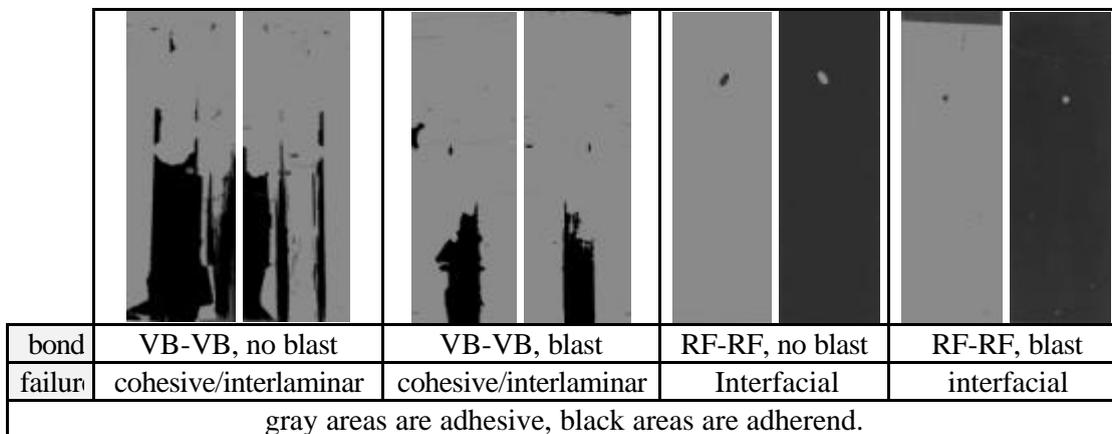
Computer-enhanced pairs of fracture surfaces of bonded composite DCB specimens
